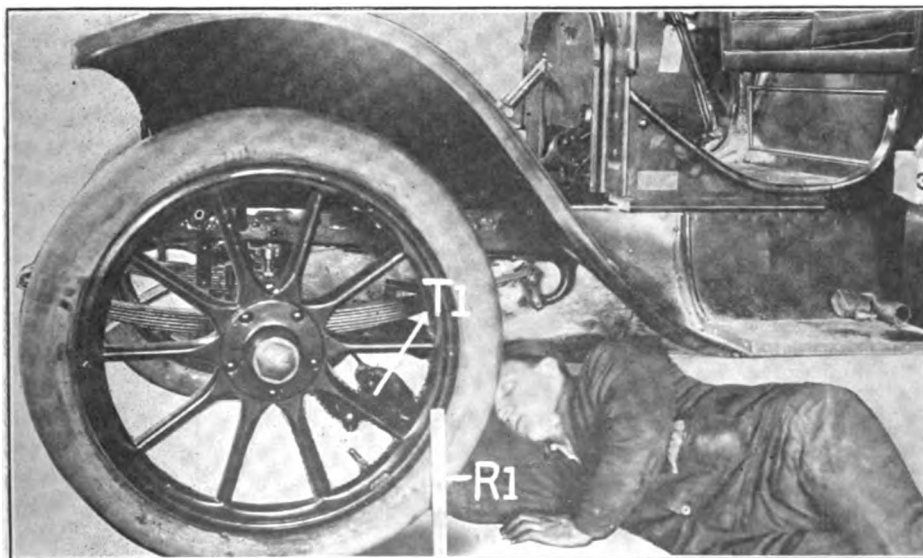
With the same tools the rear of the wheel is trued and adjusted on the connecting bar
